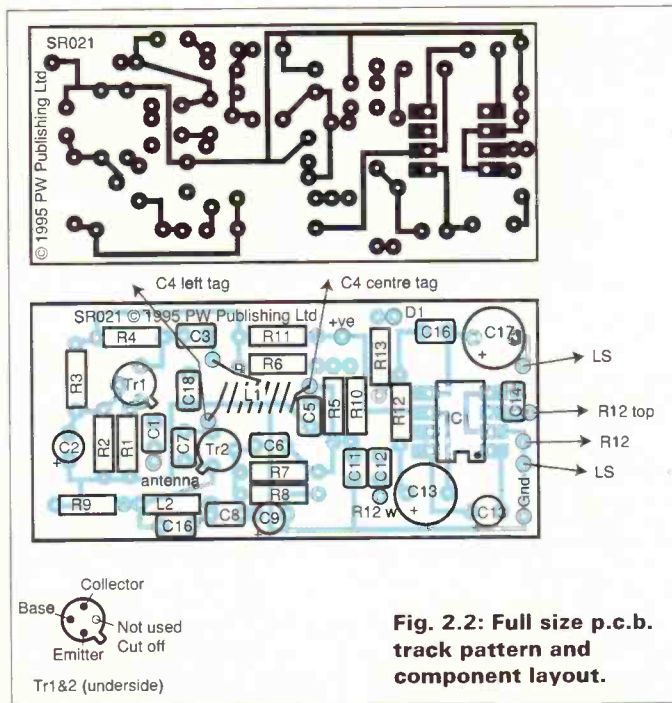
Full size p.c.b. track pattern and component layout.
